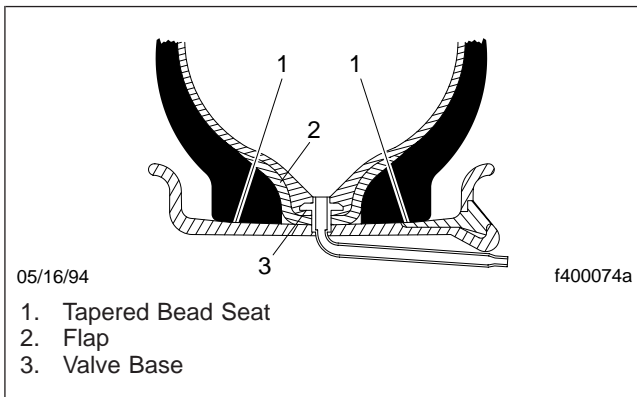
, Position of Beads, Flap, and Tube at 4 to 5 psi (28 to 35 kPa)
